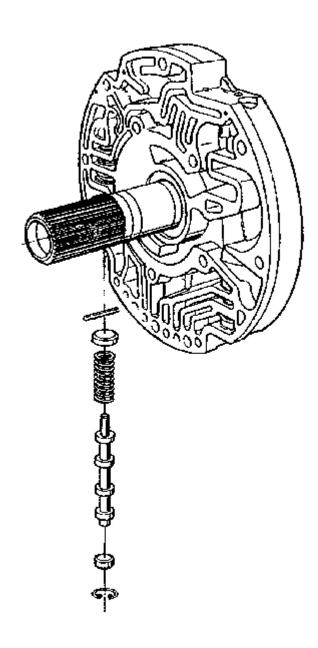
View Of TCC Valve Assembly Courtesy of GENERAL MOTORS CORP.
